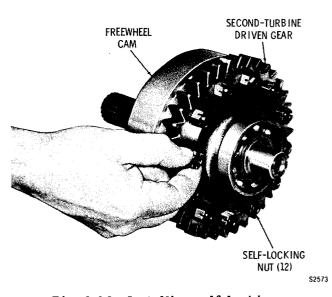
Installing self-locking nut onto freewheel cam bolt
